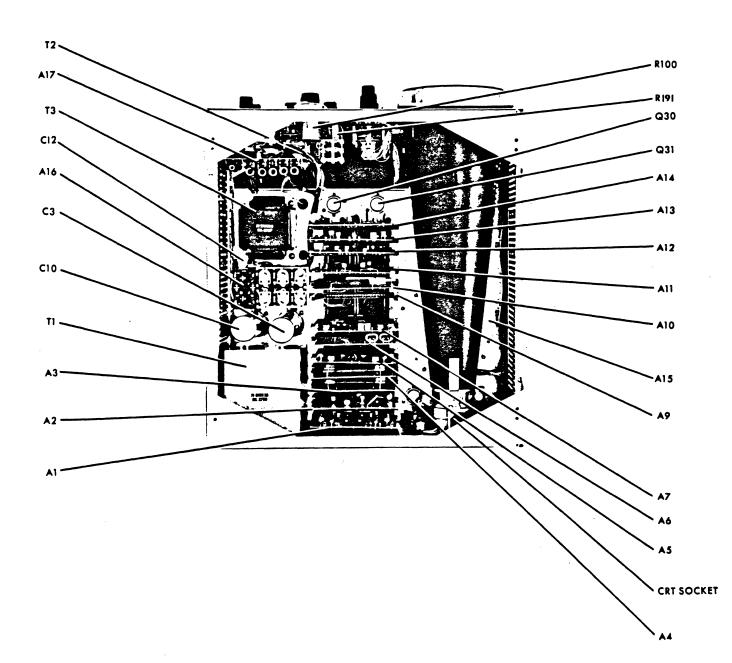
Assembly and Component Location, Main Frame, Top View
